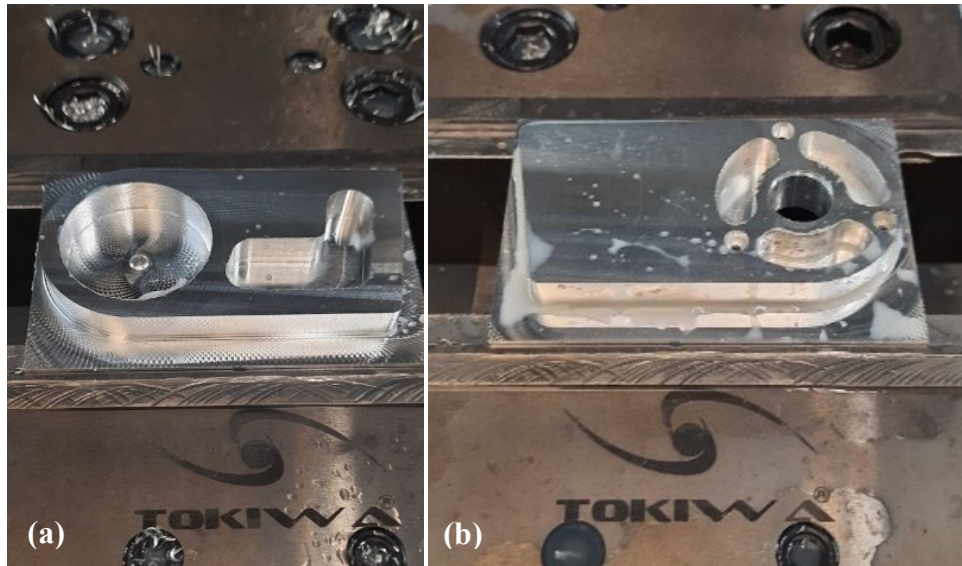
Shaft holders after machining is finished for one face (a) left shaft holders, (b) right shaft holders
